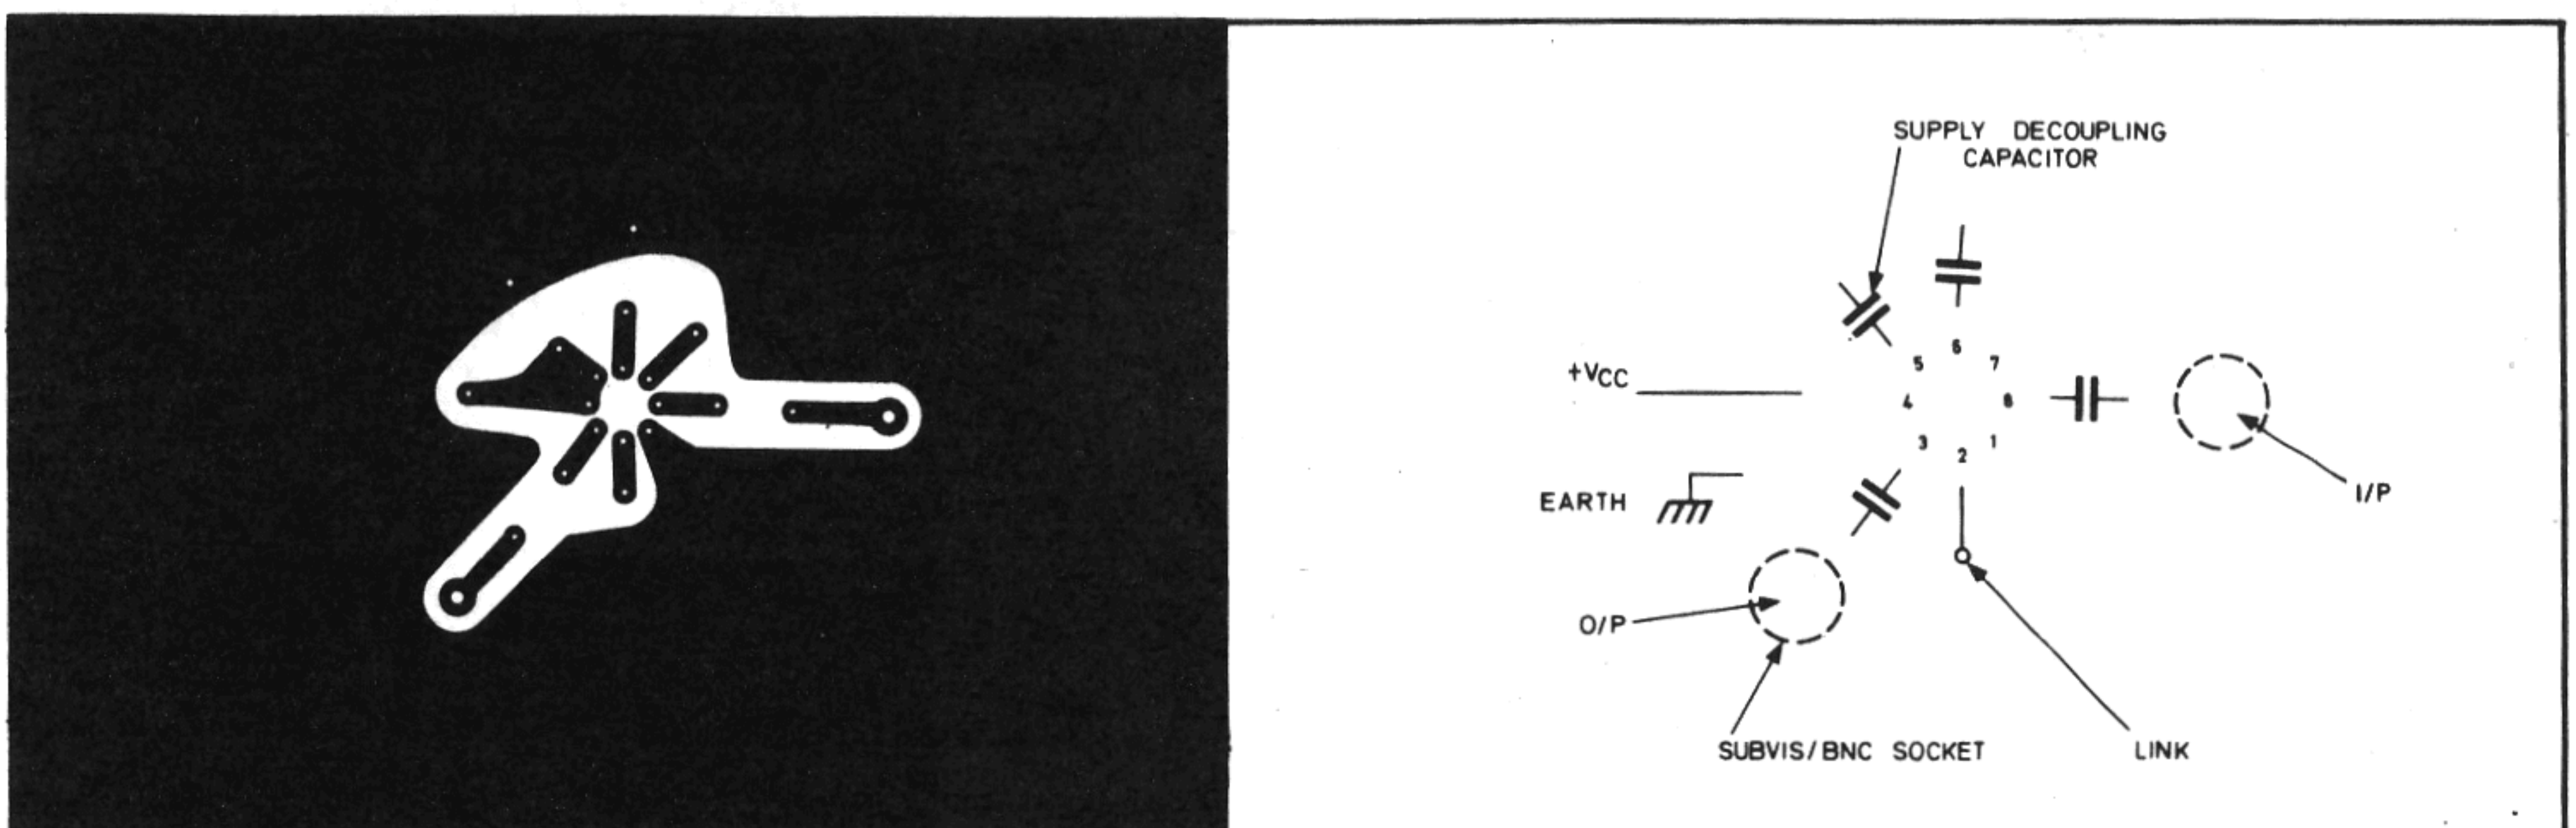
PC layout for 50-Ω line driver (see Fig. 6)
